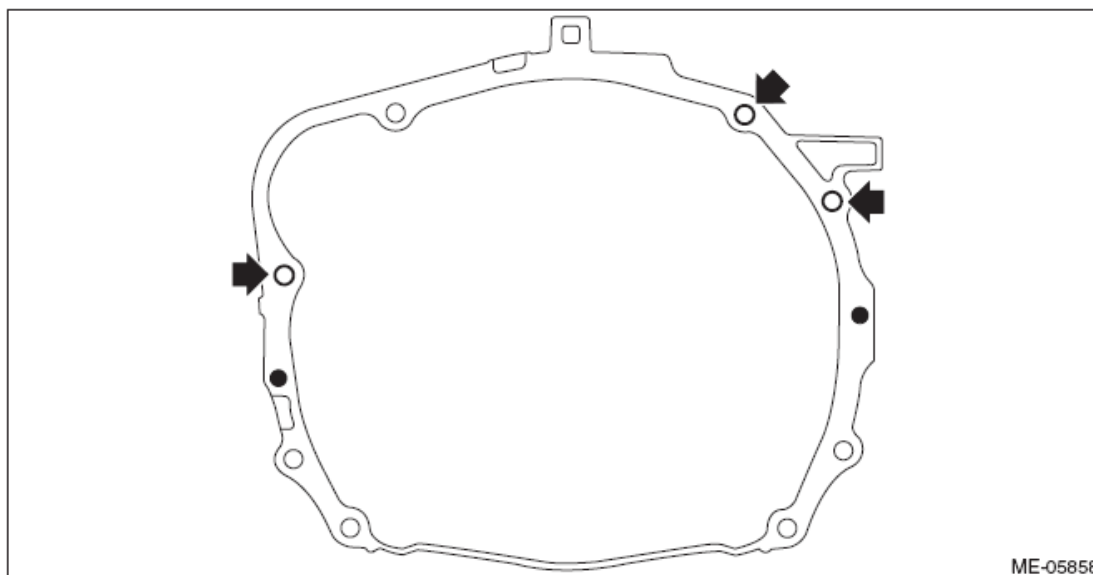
Locating Transmission To Engine Upper Side Bolts (CVT Model)
